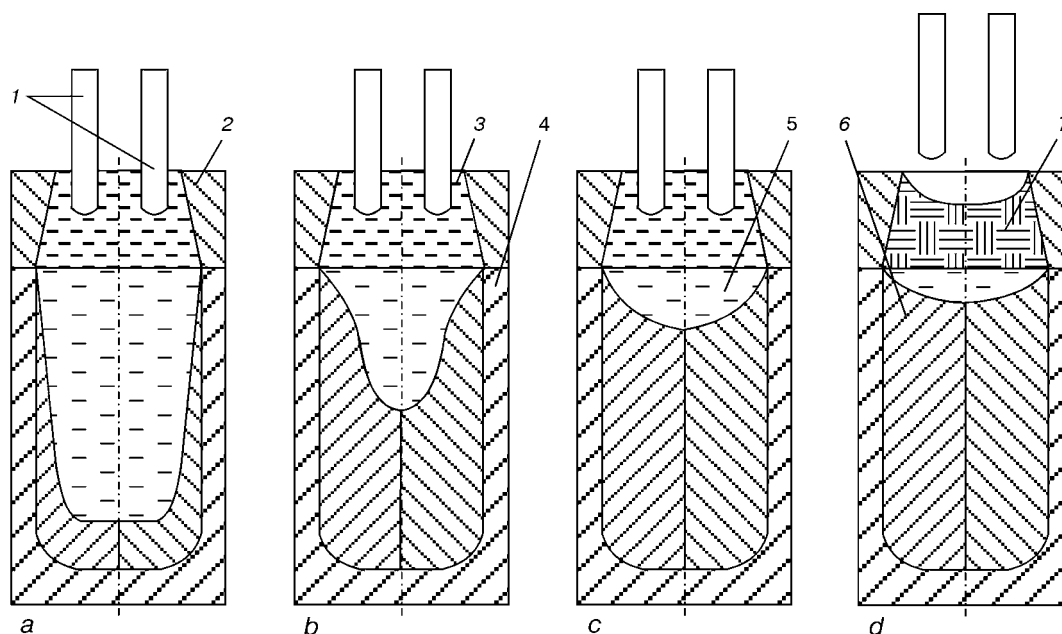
Scheme of electroslag heating of a head part of ingot: 1 — electrodes; 2 — hot top; 3 — molten slag; 4 — mould; 5 — molten metal; 6 — solid metal; 7 — solid slag
